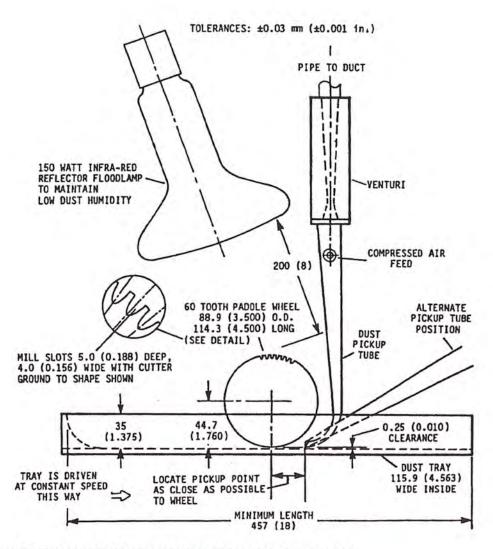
Critical dimensions of dust feeder assembly. Dimensions are in mm (in.).
